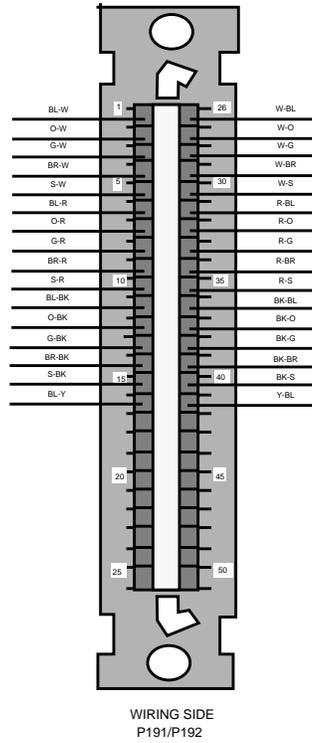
Cable Assembly ED7C723-35 Group 18
